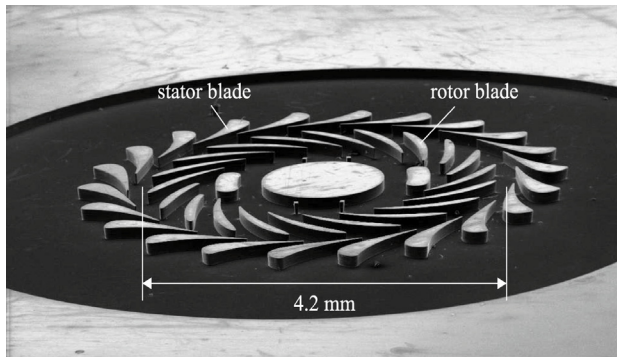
SEM image of a 4.2 mm diameter by 500 μm thick rotor with radial turbine blades on one side (the other side may consist of an electric motor or generator). There are 22 outer stator blades and 20 inner rotor blades fabricated by DRIE. The blade height is 150 μm .
